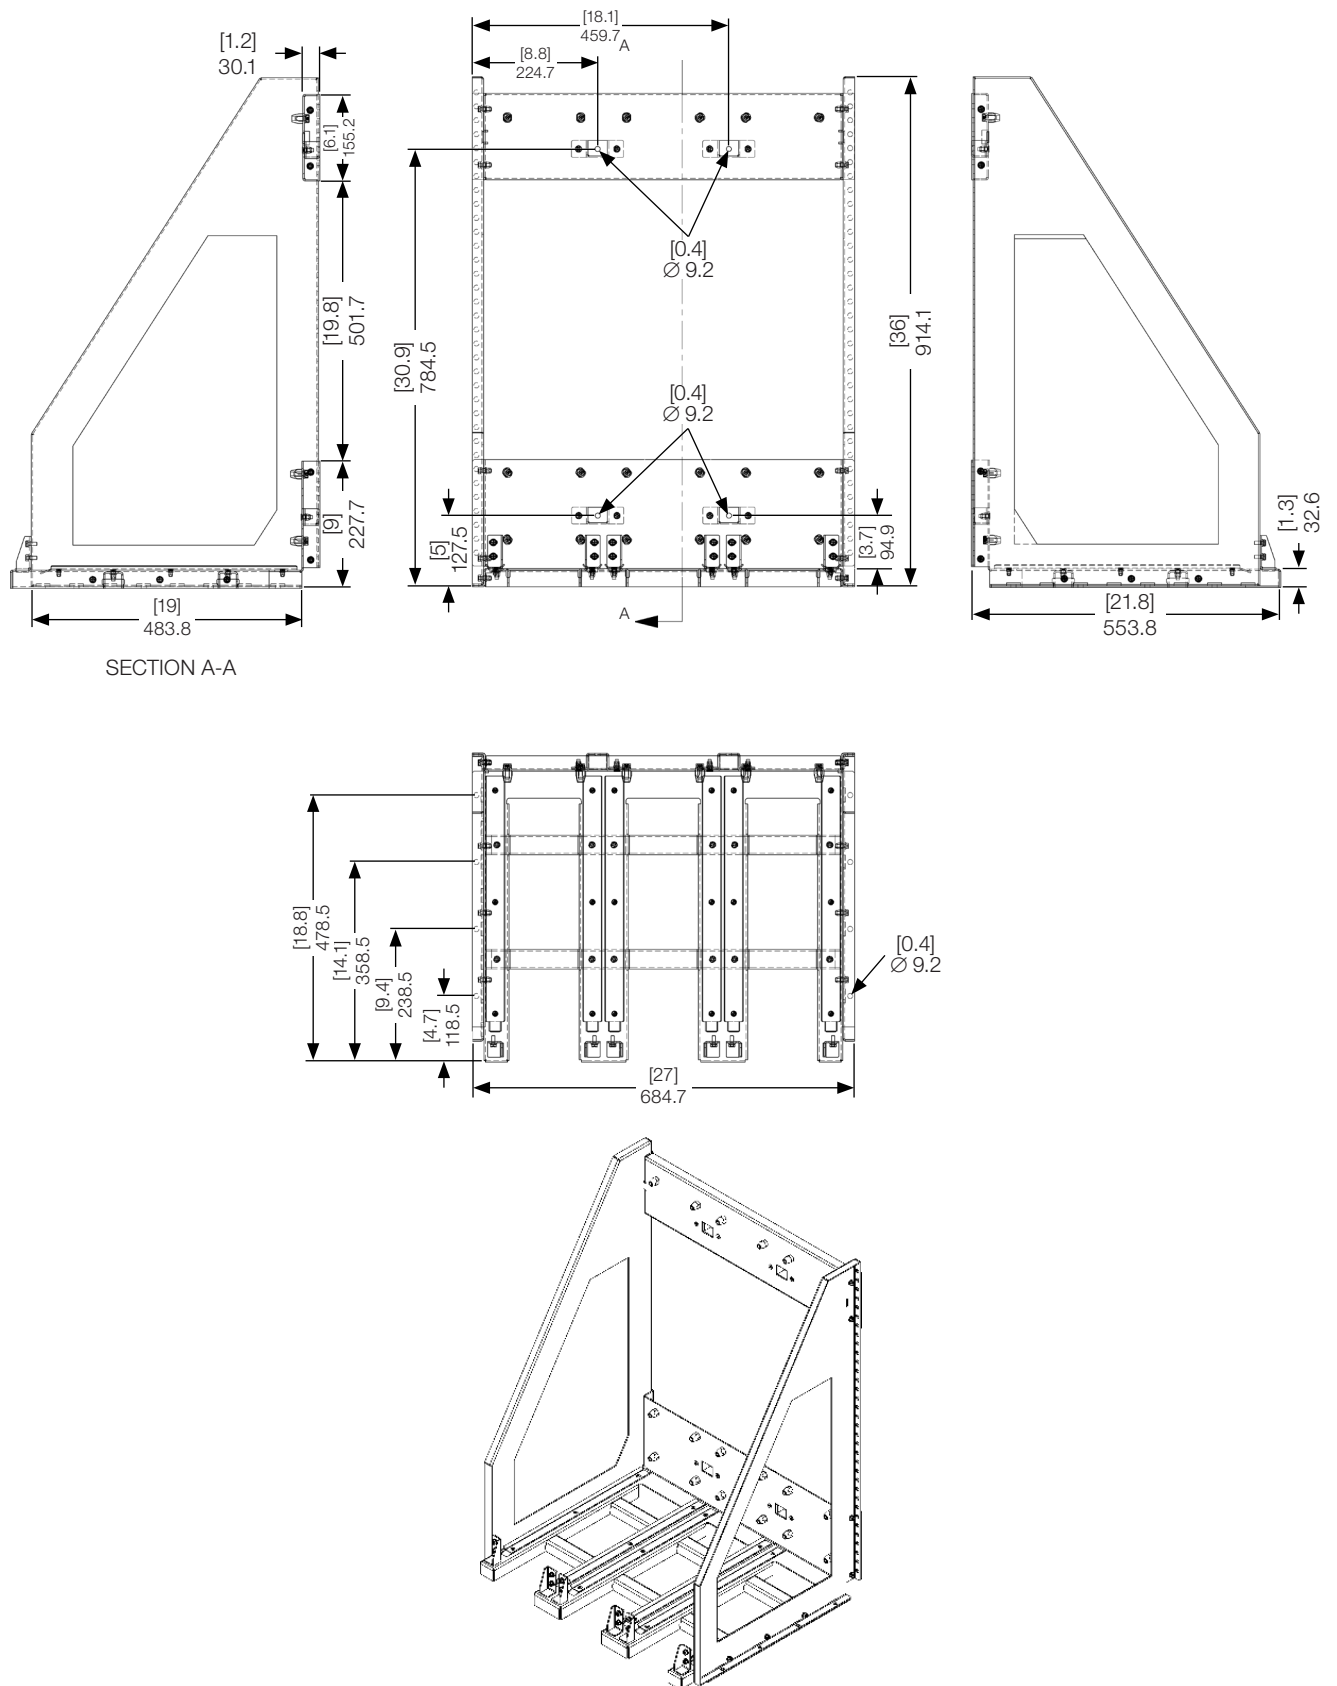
Dimensions of Rack 3 G2 in mm [in]
